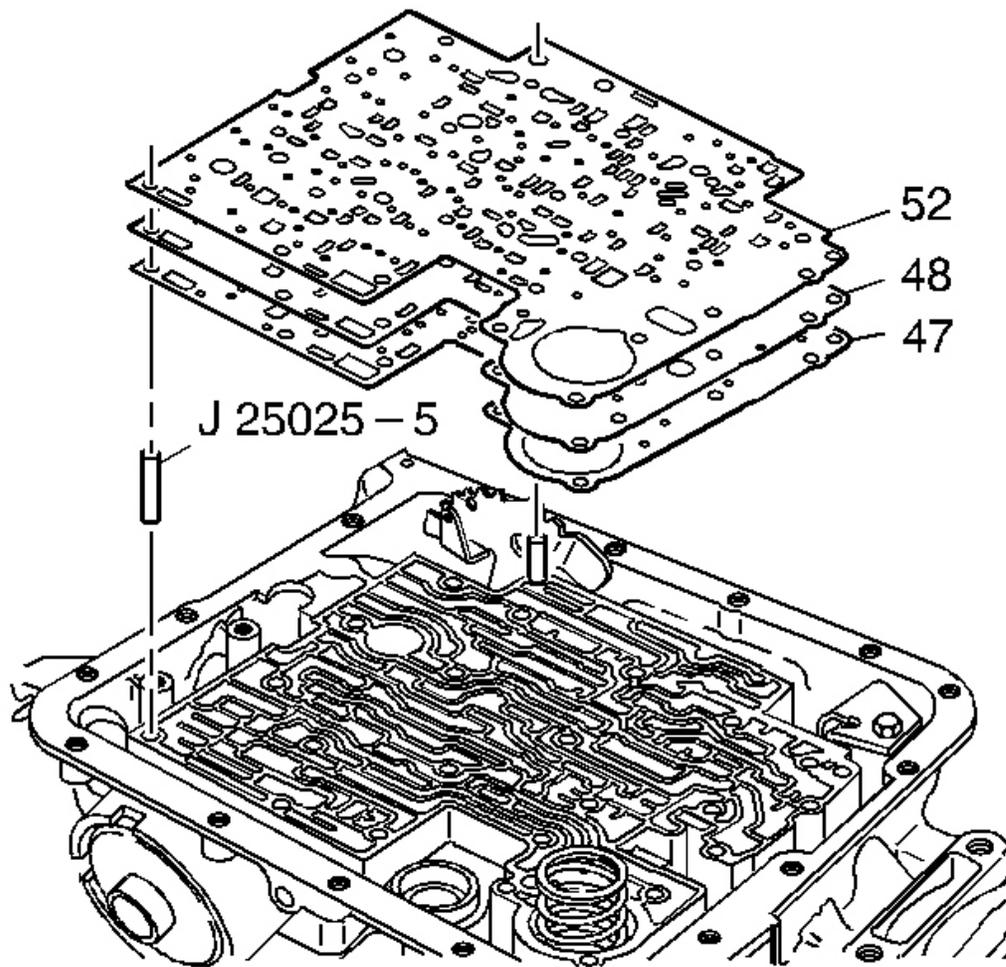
Spacer Plate To Case Gasket, Spacer Plate To Valve Body Gasket On Spacer Plate
